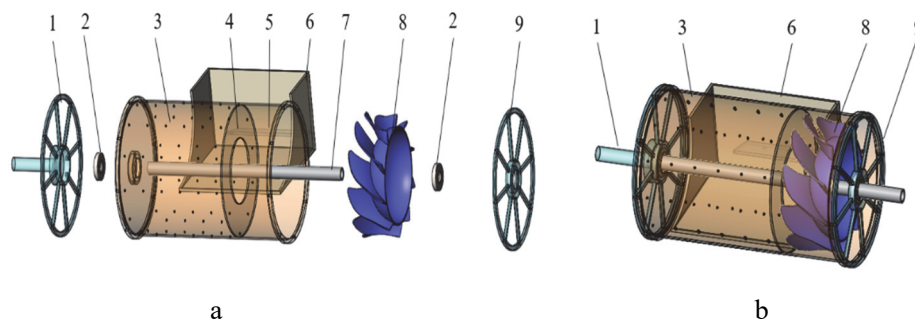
Structure diagram of seed-metering device: (a) exploded view. (b) assembly diagram. 1. Drum retaining ring 2. Bearing; 3. Drum 4. Annular partition 5. Fan blade air chamber 6. Seed box 7. Transmission shaft 8. Fan blade 9. Fan blade retainer
